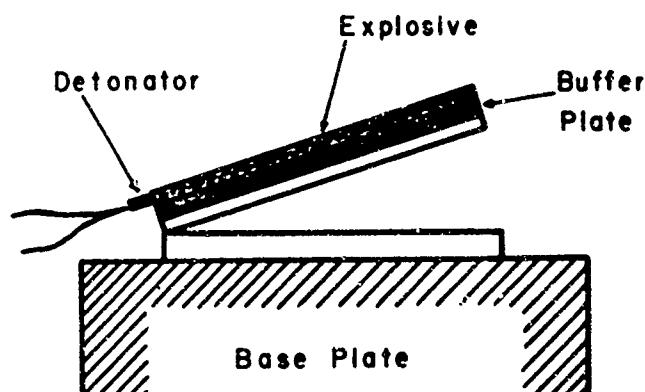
Experimental Arrangement for Explosive Welding of Plates
